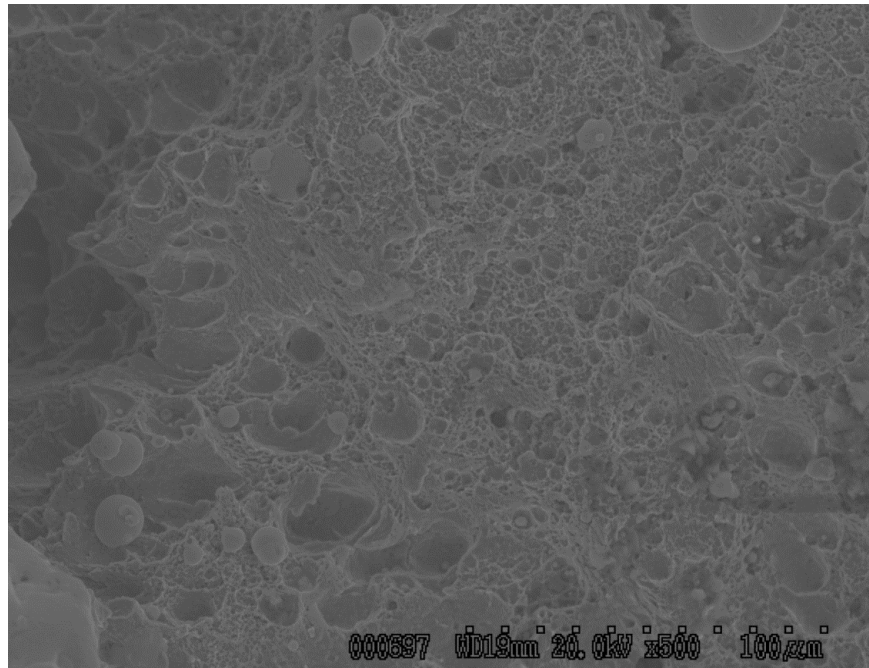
Scanning electron microscope fractograph of generator shaft fracture subsegment "A", Area 1.
